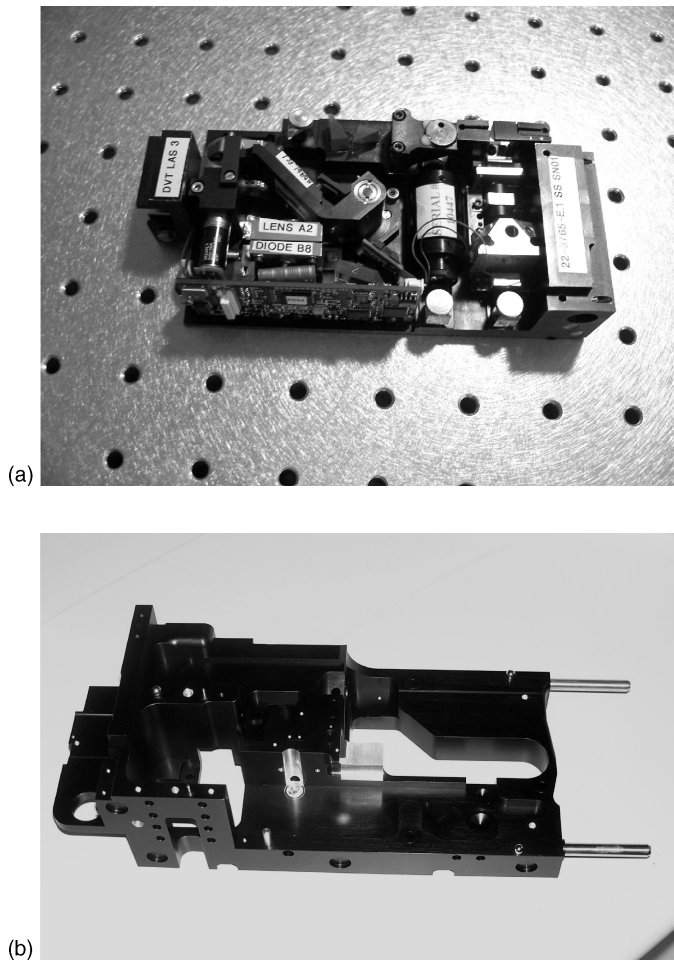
(a) Laser FRU without cover. (b) OMA baseplate with rails for mounting FRU
